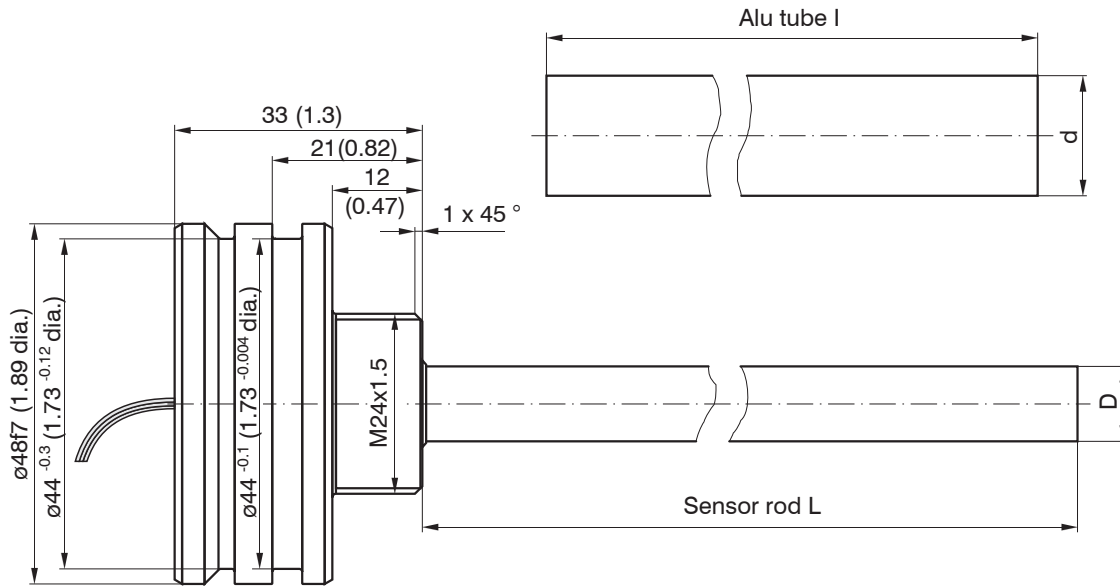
induSENSOR with axial wires, model EDS- ... -Z, dimensions in mm (inches), not to scale
